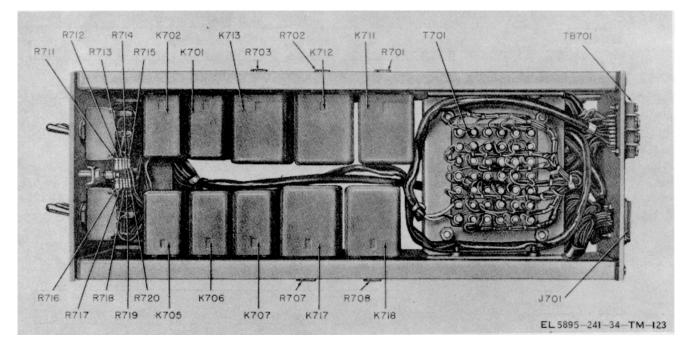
Control, Transmitter C-3446/FSW-8, top view, parts location.
